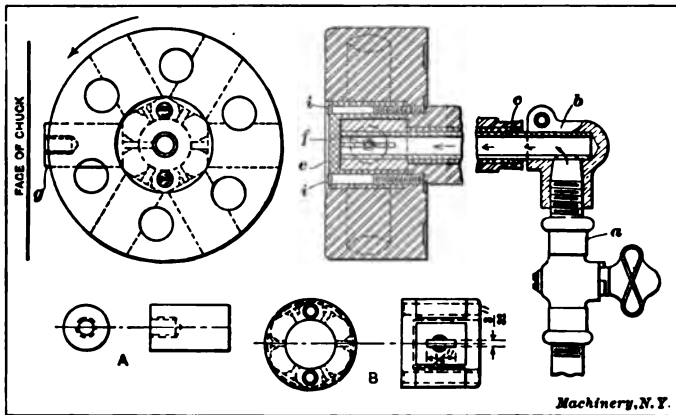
Sectional View showing Construction of Oil-pumping Attachment for Turret Tools
